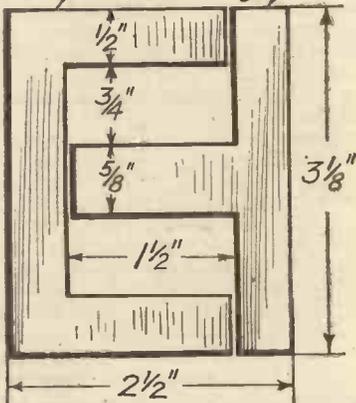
A sketch giving the dimensions of the No. 5 stallo stampings required for the first choke described.
